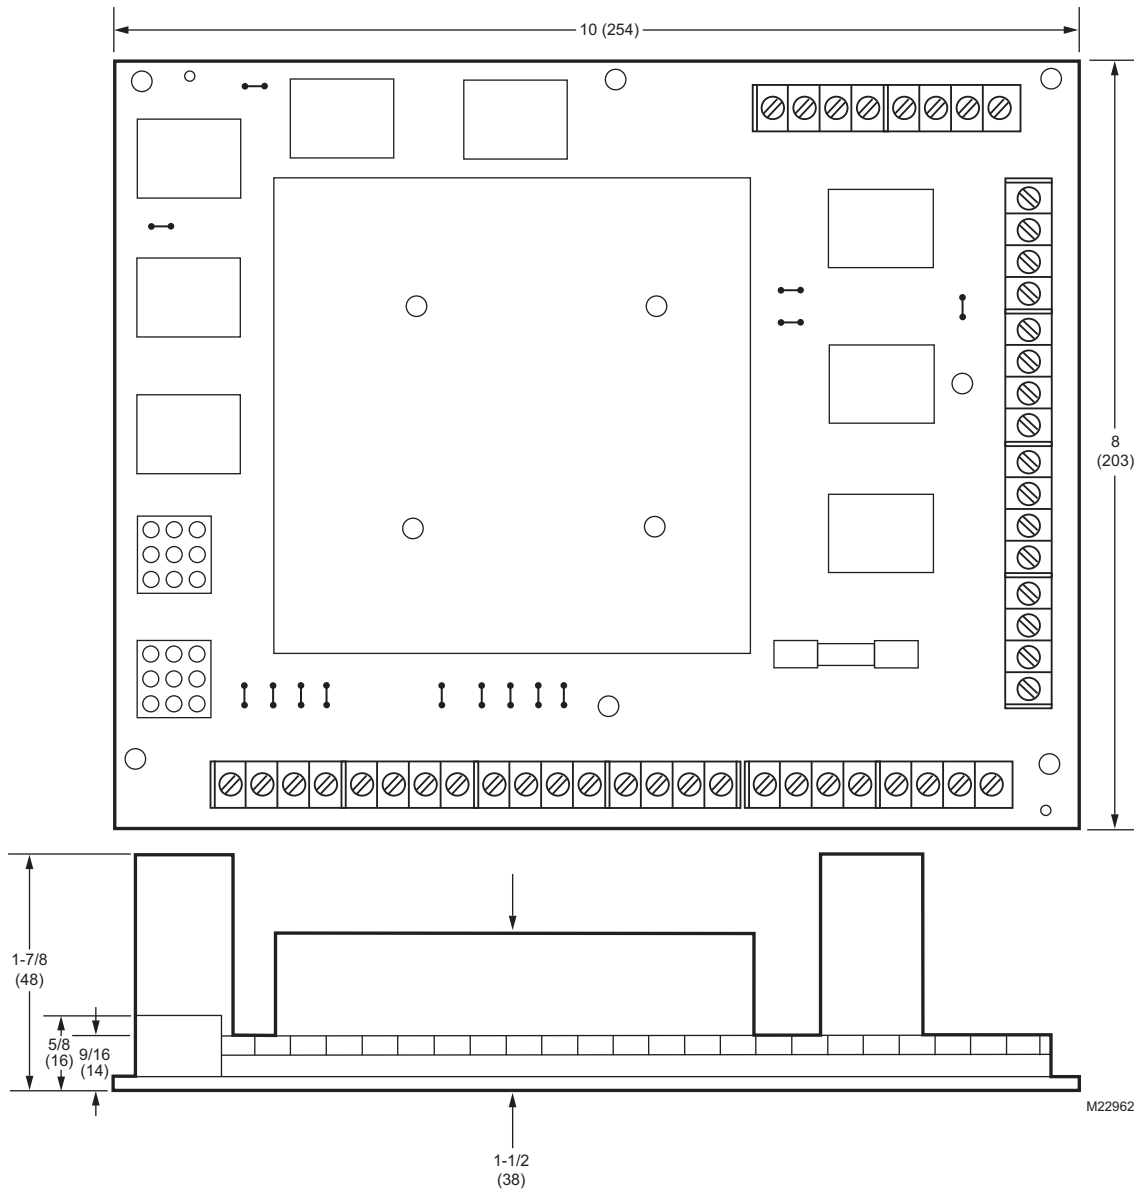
Q7800H Integrated Burner Control Subpanel, dimensions in in. (mm).
